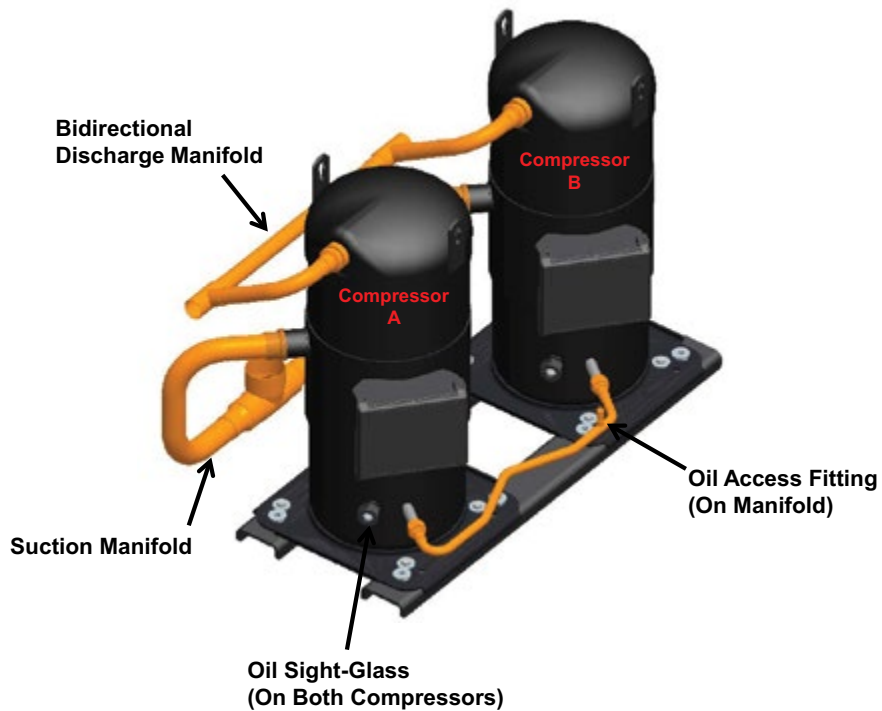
Typical Braze Connected Tandem with OEL Oil Manifold
